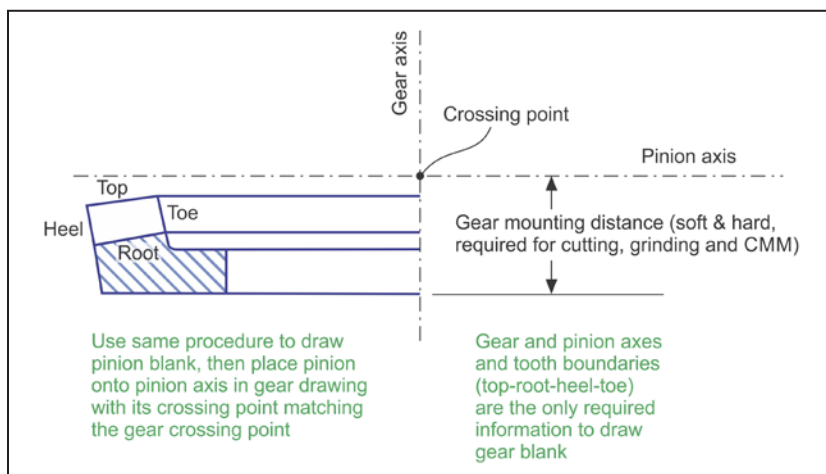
Fit the tooth and the gear or pinion body and define the mounting distance.
